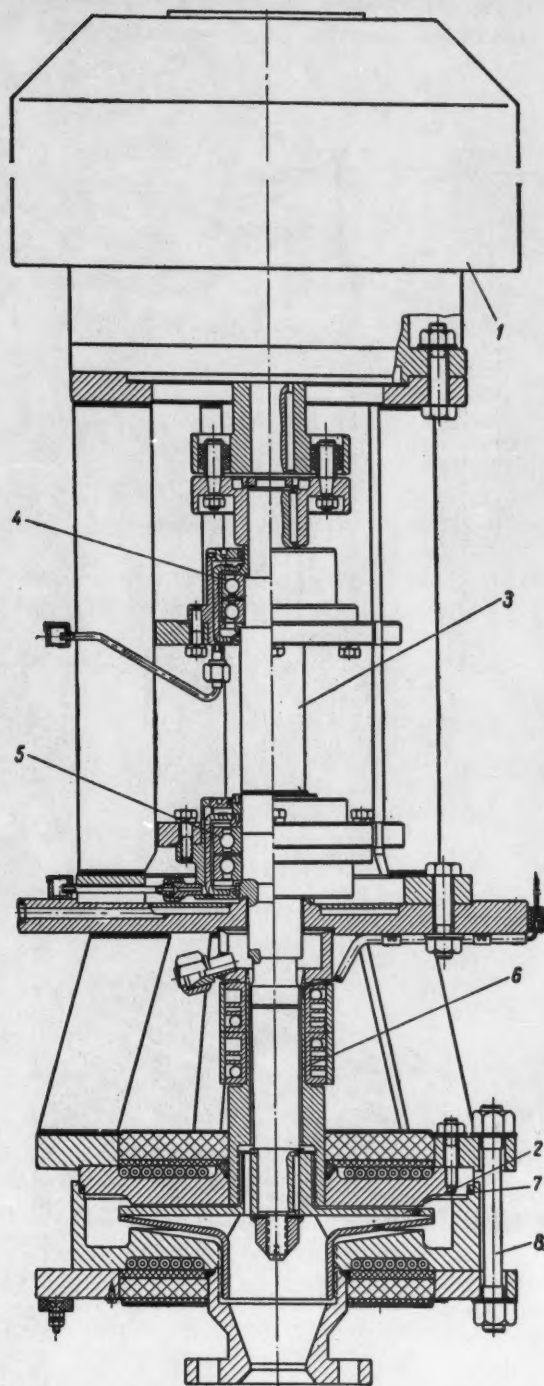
Centrifugal pump with a bearing of frozen sodium: 1) electric motor; 2) impeller; 3) shaft; 4) journal-thrust bearing; 5) journal bearing; 6) bearing of frozen sodium; 7) packing; 8) pin.
